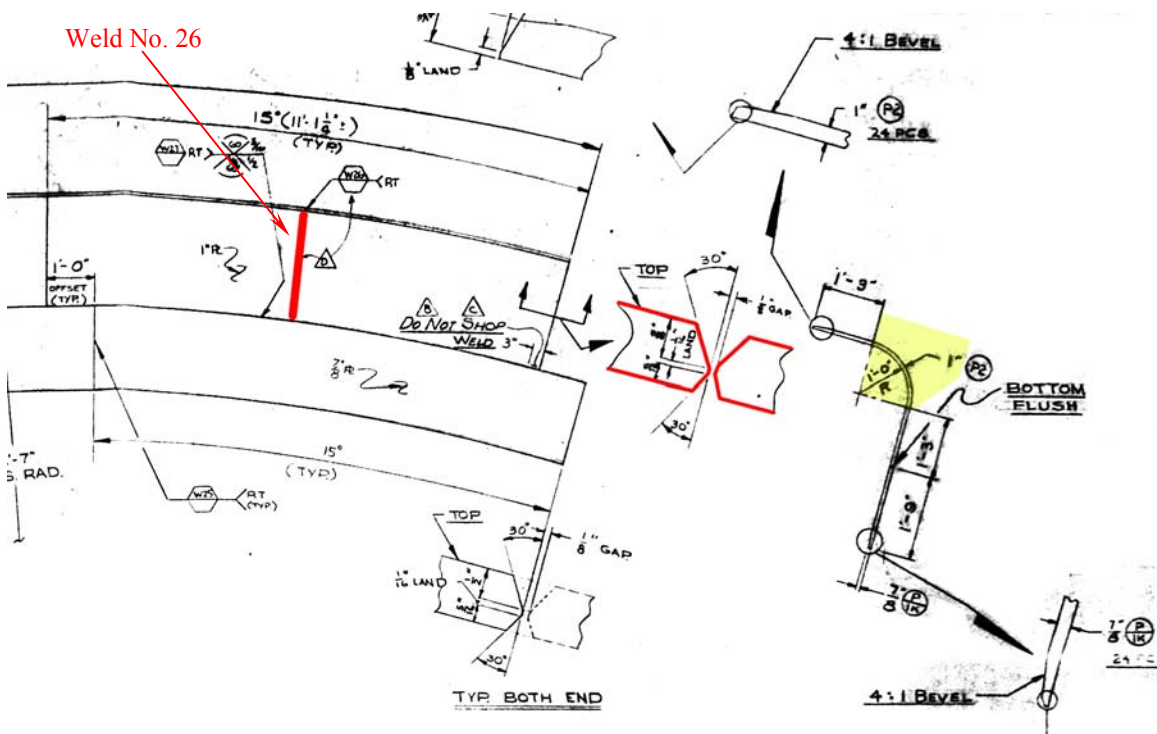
Vertical seam weld No. 26 in the bottom knuckle area (thickness: 1 inch).
